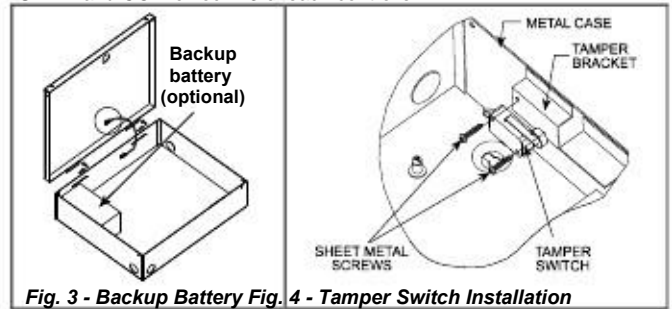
Backup Battery Fig. 4 - Tamper Switch Installation
